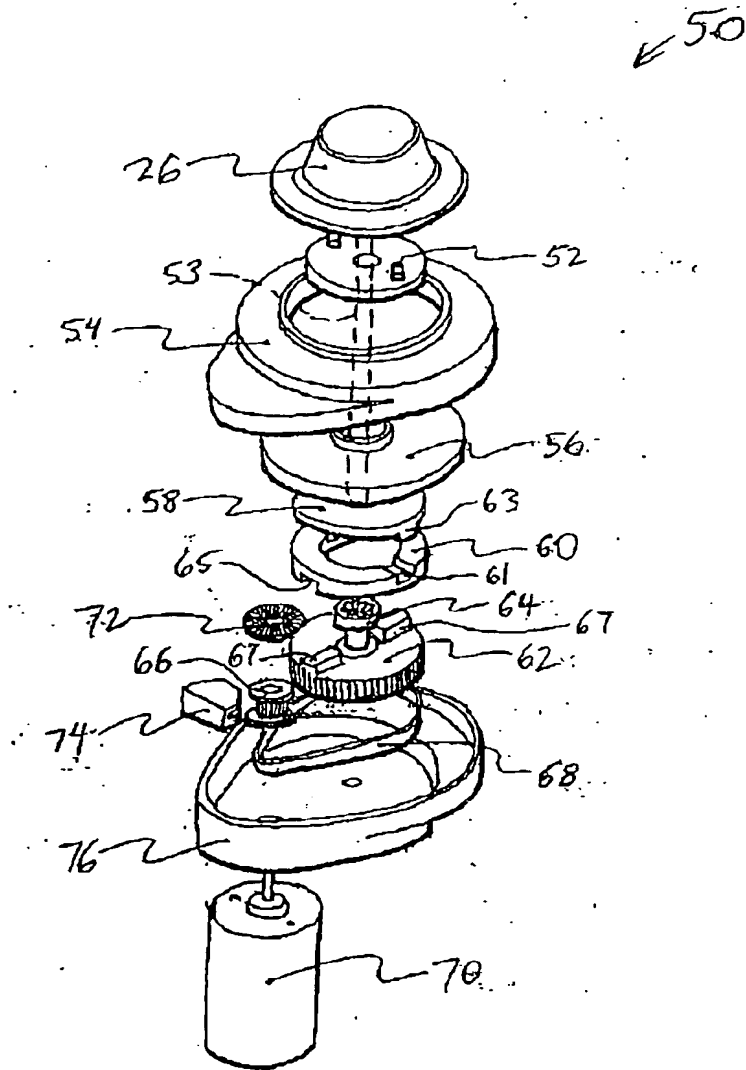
is a perspective view of a knob control device providing a gear transmission that allows the knob to translate axially; and
